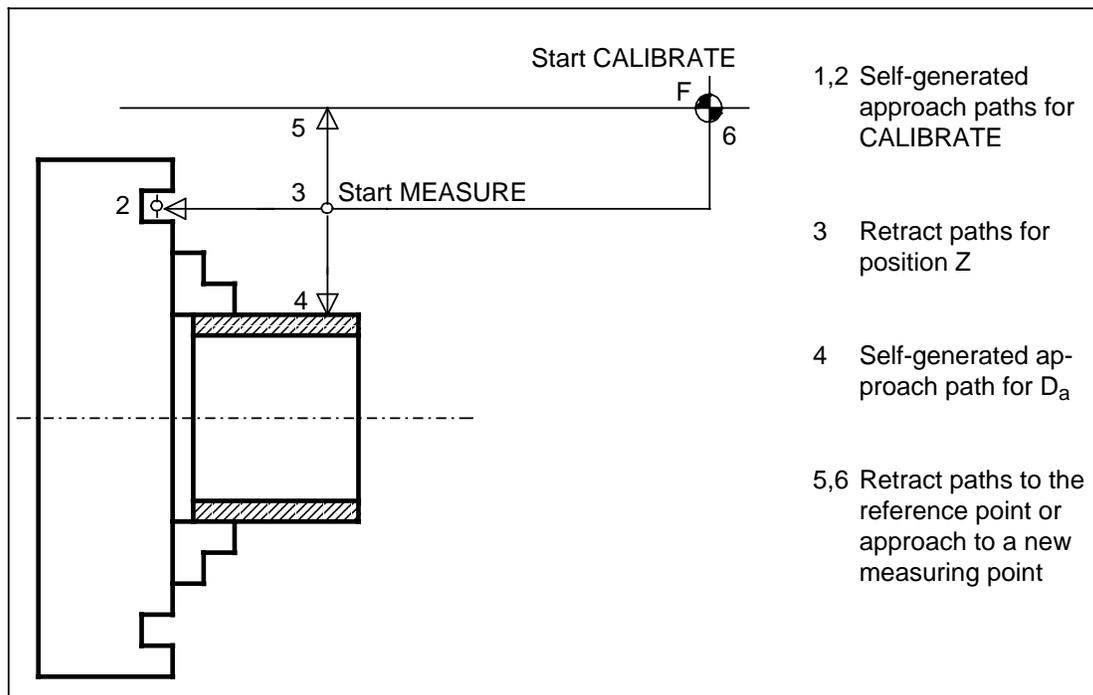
1-point measurement on outside diameter with CALIBRATE
